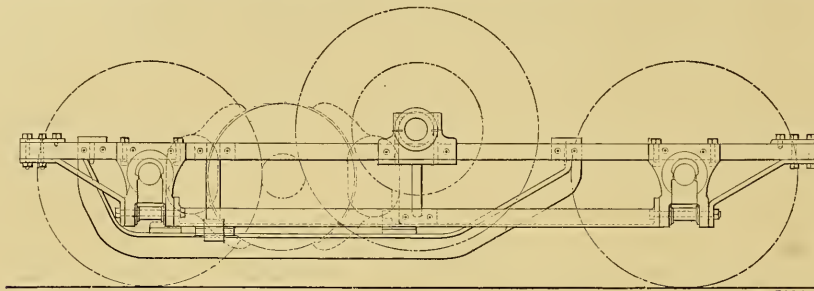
SIDE VIEW OF FULLY EQUIPPED MOTOR TRUCK. (To be used with any variety of car body.)
